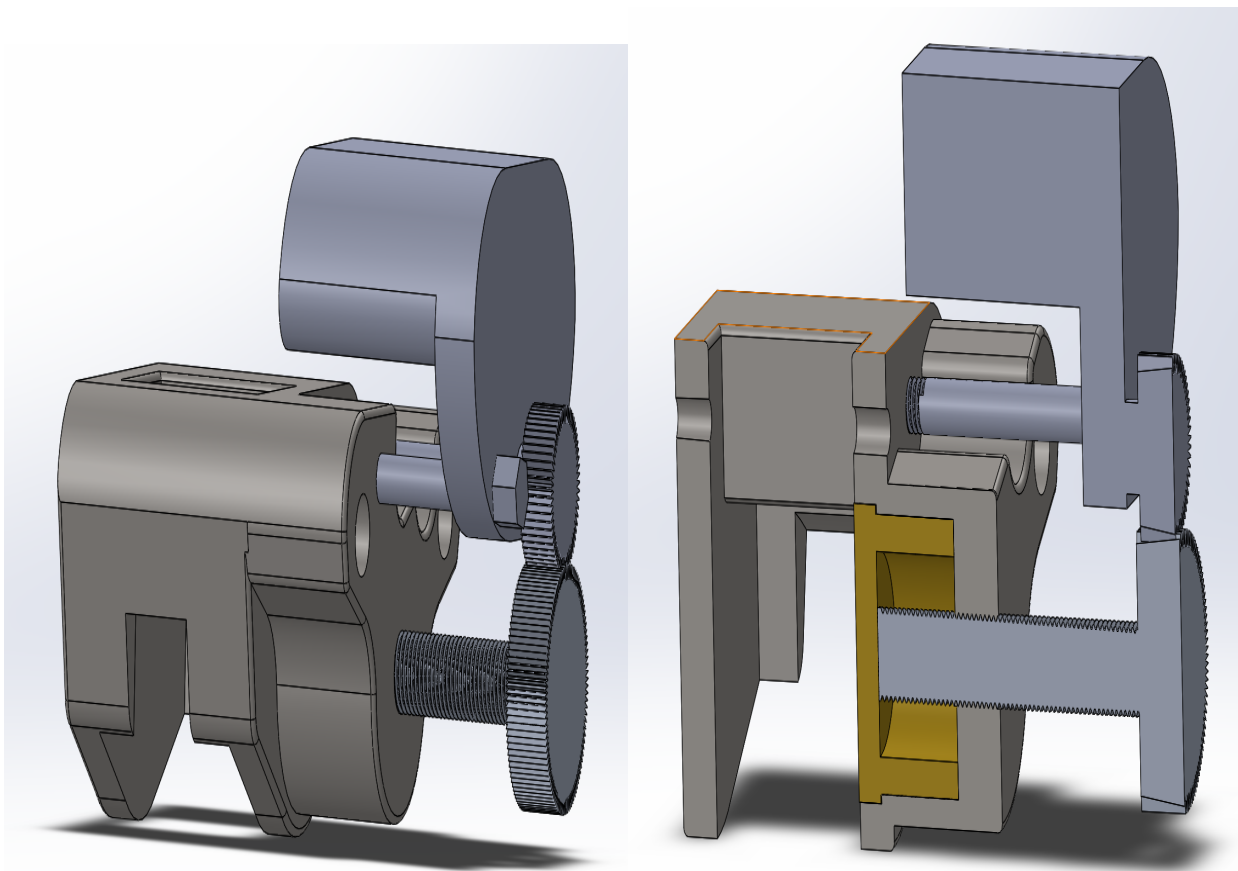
Shows concept 2 design(Transferring the force by electric motor)
